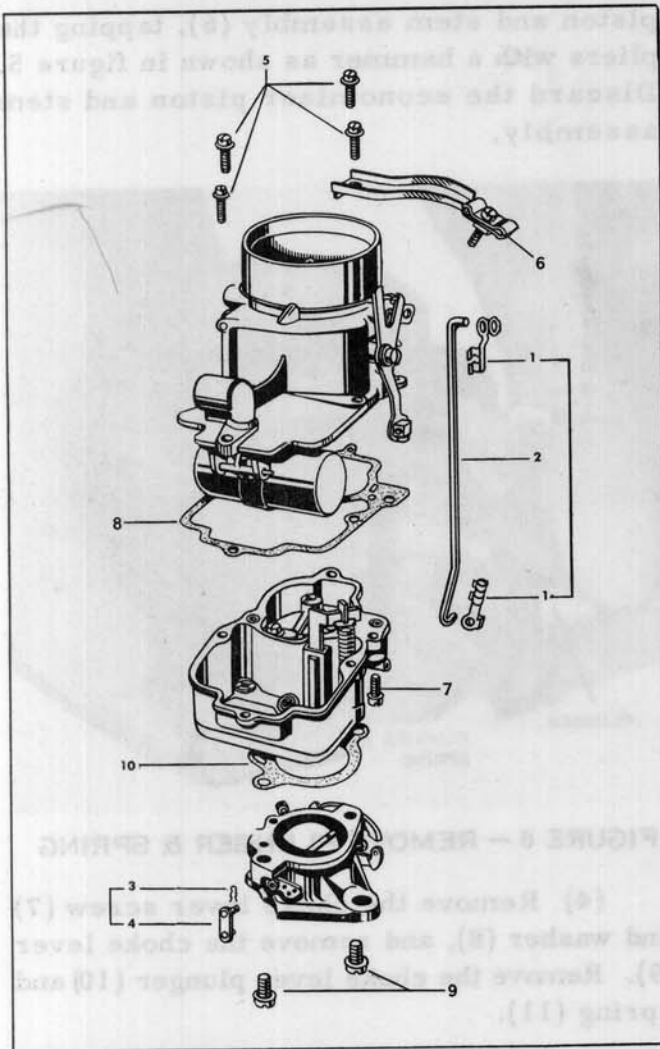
DISASSEMBLY - 3 MAJOR SUB-ASSEMBLIES
